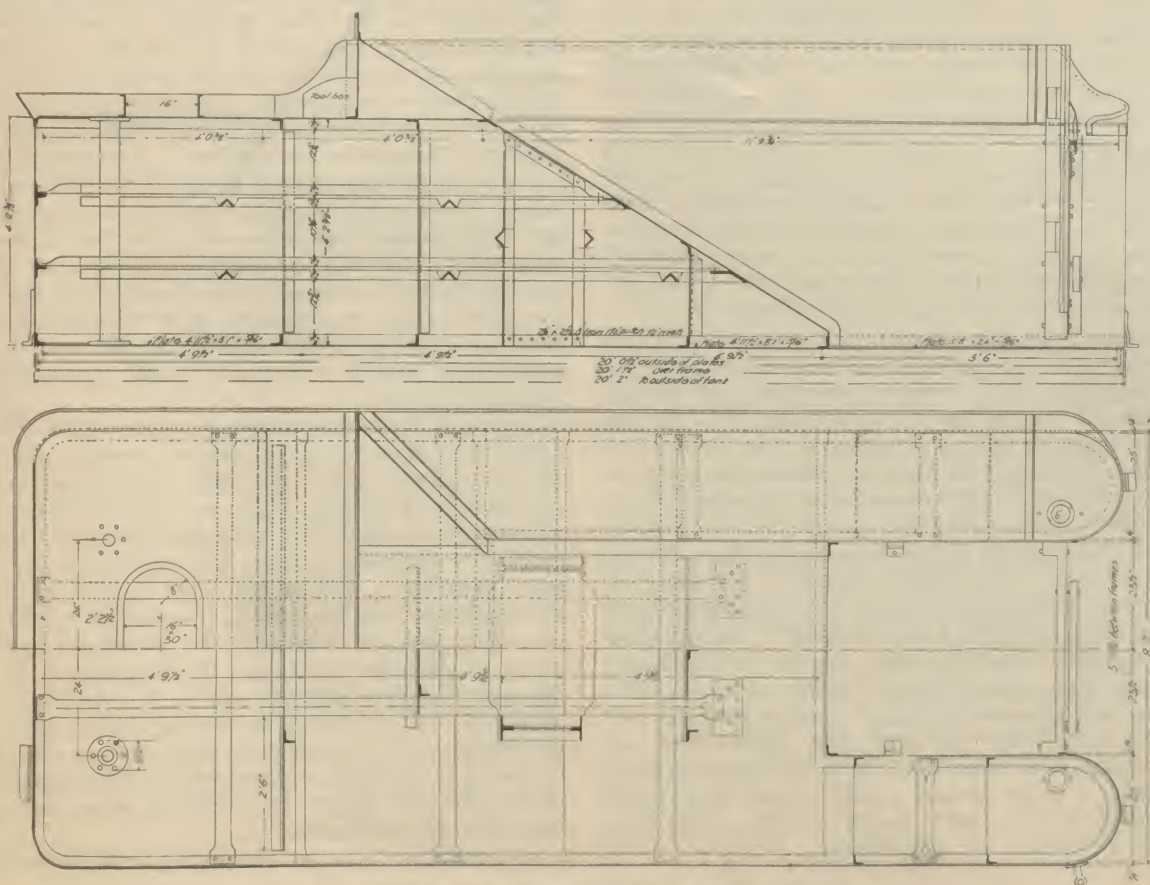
OUTLINE AND SECTIONAL VIEWS OF TANK.
